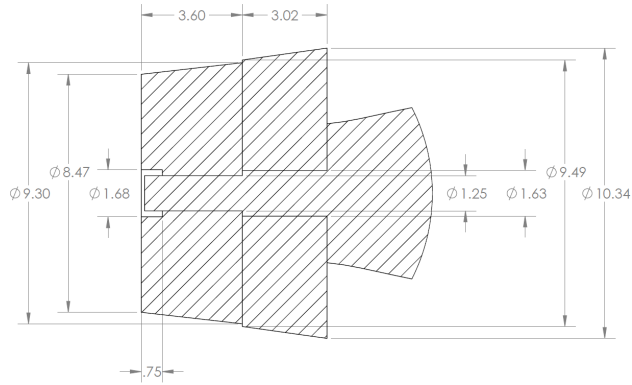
Detail View of Mk54 Torpedo Propeller Design Space
